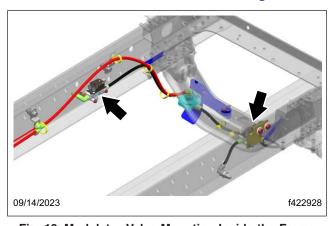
, Modulator Valve Mounting Inside the Frame Rails
